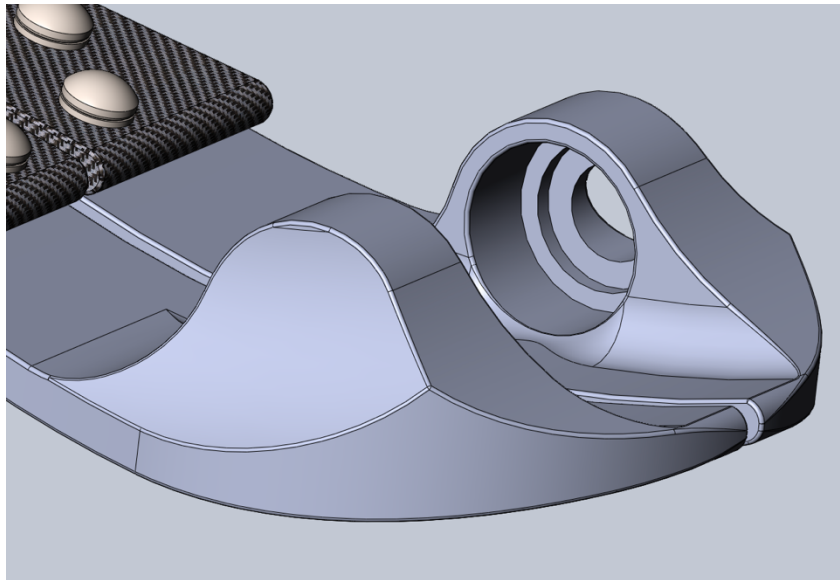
Detail of Spherical Bearing Recess and Axle Pass-through (cosmetic skin removed for clarity)
